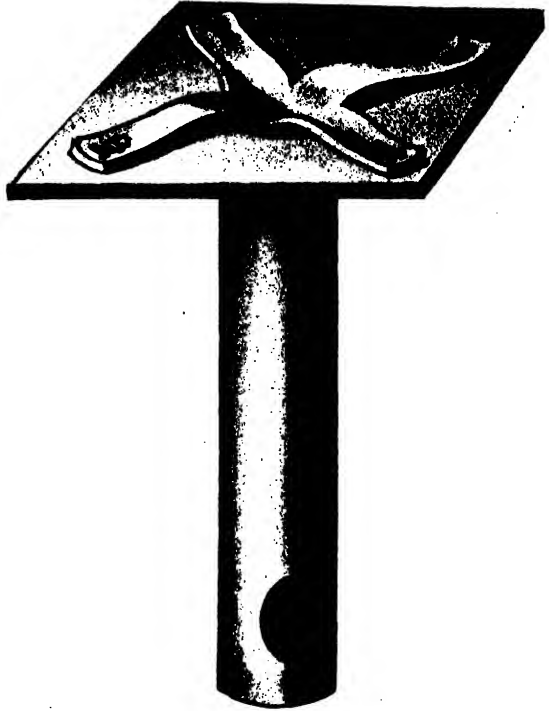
FLANGED TUBE. The flange is attached with twisted silver wire; observe the position of the hole.
